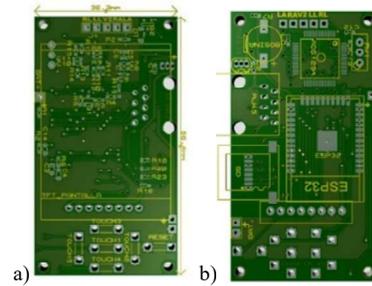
Printed circuit board. a) Upper face. b) Lower face.
